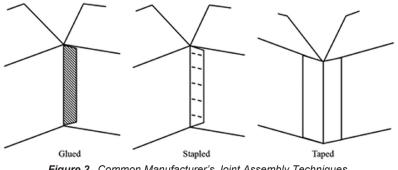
Common Manufacturer's Joint Assembly Techniques.
